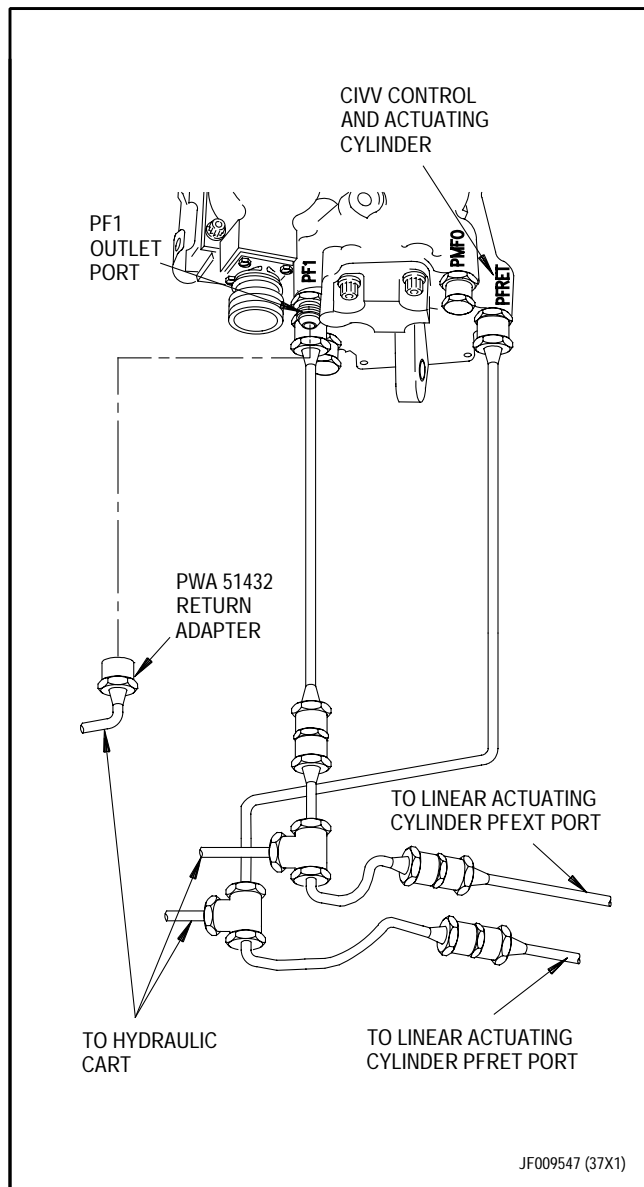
Compressor Inlet Variable Vane System - Tooling Installation (Sheet 3 of 3)
